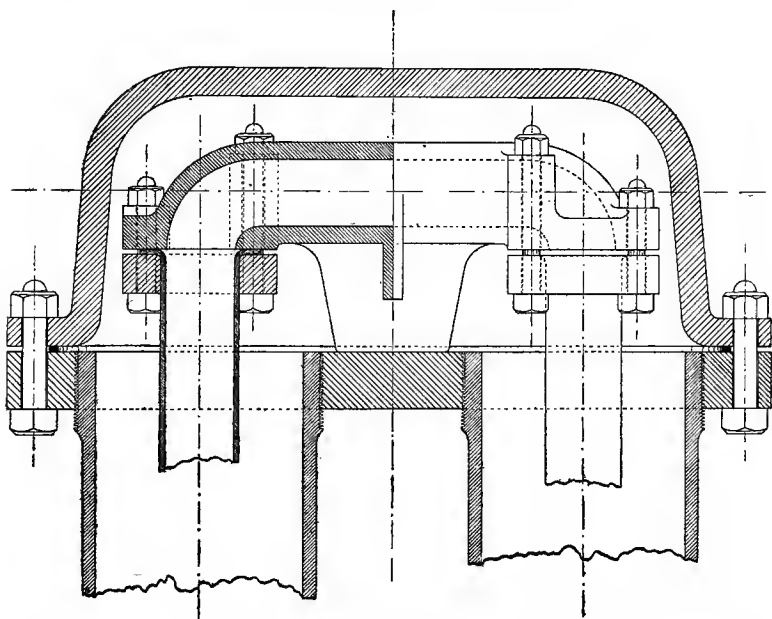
HEADER OF CRUSE CONTROLLABLE SUPERHEATER, SHOWING METHOD OF MAKING JOINTS.
